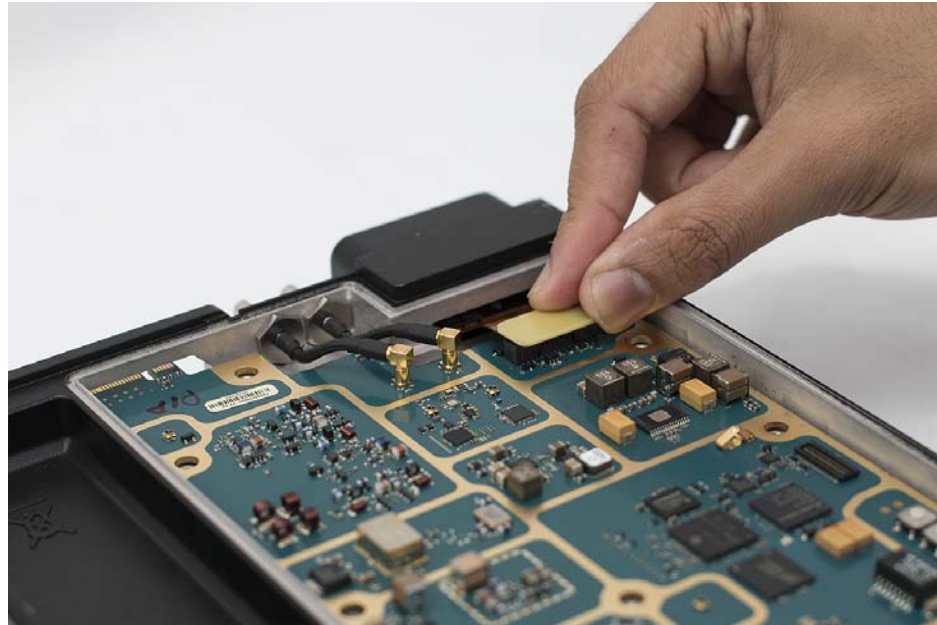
Connecting Rear Accessory Connector Flex and GPS/BT/Wi-Fi Cables
